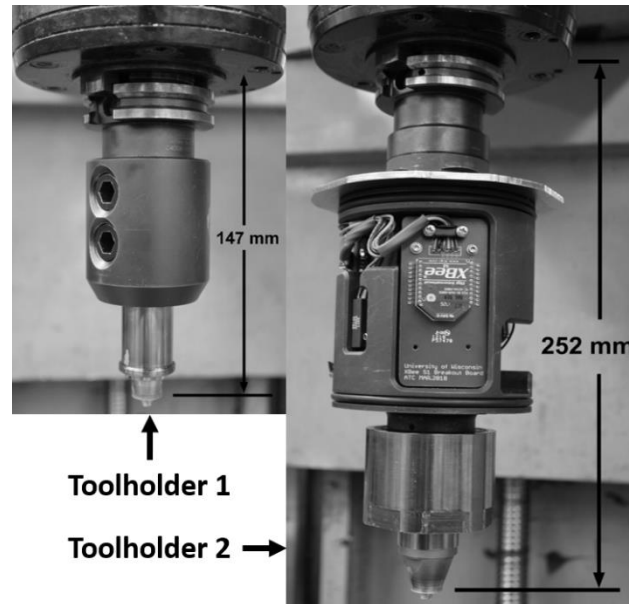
The experimental apparatus used to measure process force and tool motion during welding. Note that the angular encoder is attached to the spindle motor and not shown.
